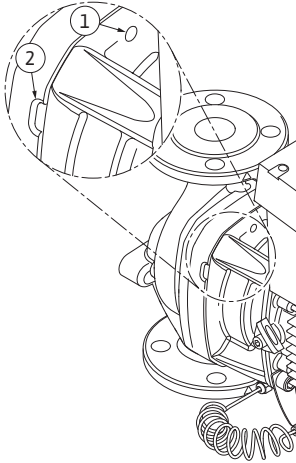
Threaded holes and slots for pressing off the motor impeller unit from the pump housing
